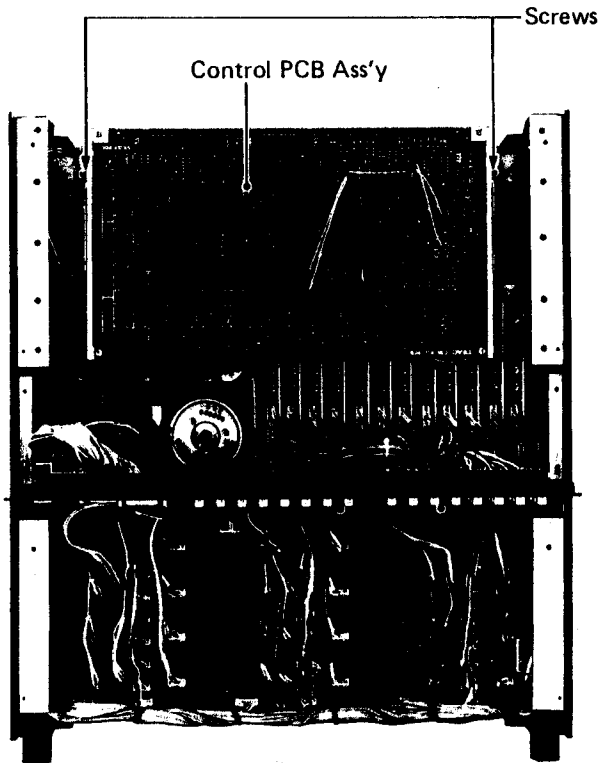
CONTROL PCB INSIDE THE TOP REAR PANEL
